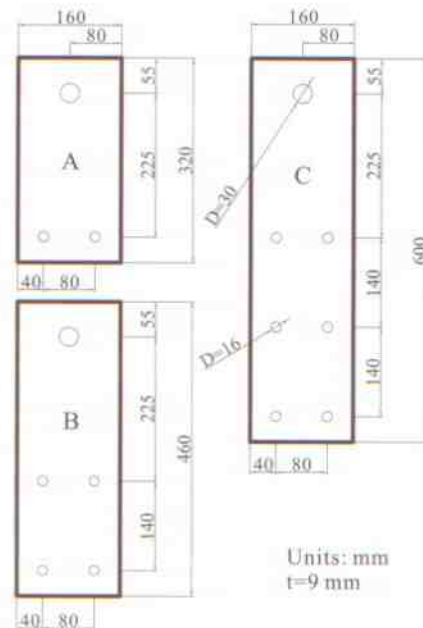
Design of the mechanical fasteners for tensile testing of bolt joints. (A: 2 bolts, B: 4 bolts, C: 6 bolts, diameters: 15.88 and 19.05 mm).
